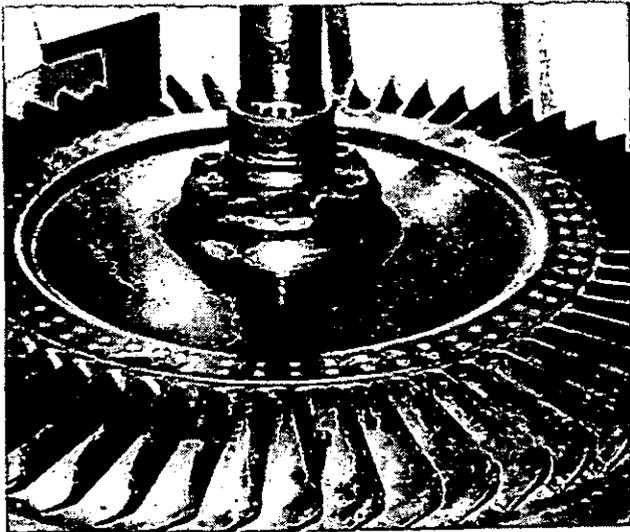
Uncooled turbine blades held by pins and brazed to disk. A special supply of cooling air was directed to the blade roots to maintain the strength of the soldered joint. The splined shaft coupling can also be seen. Each blade weighed 12.25 oz. Rivet diameter was 11 mm. Estimated maximum centrifugal stress $\approx 18,000$ psi and gas bending stress $\approx 3,000$ psi. Later models had air cooled hollow blades.
